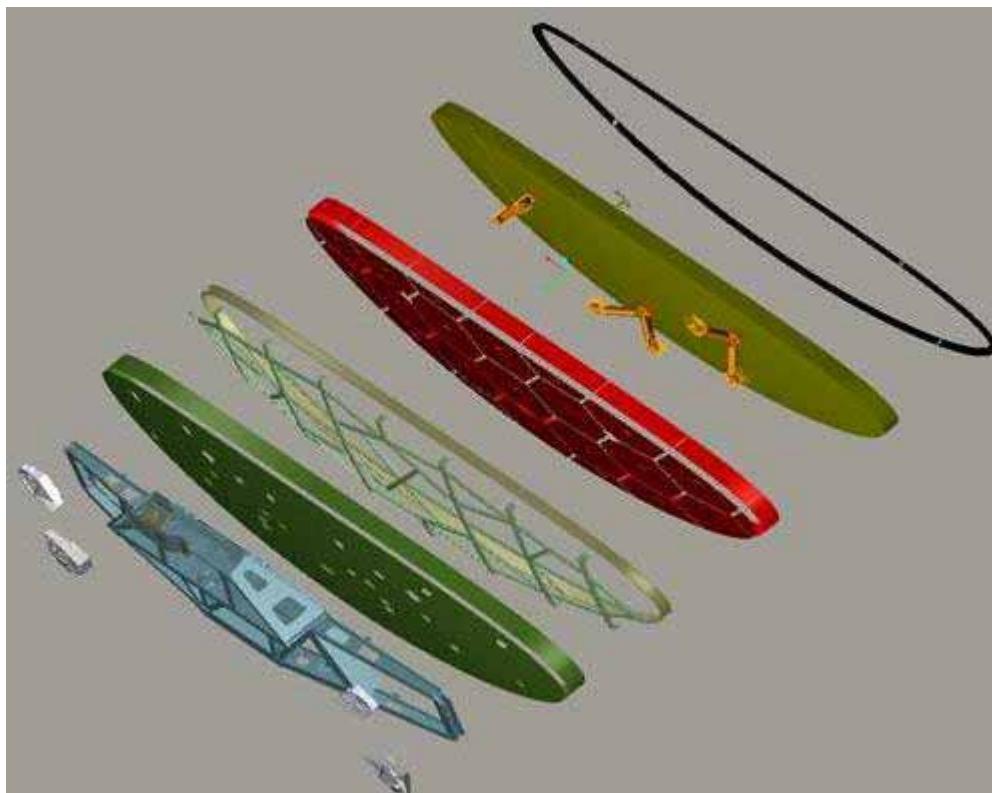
Exploded View of the Primary Mirror Assembly (PMA)
